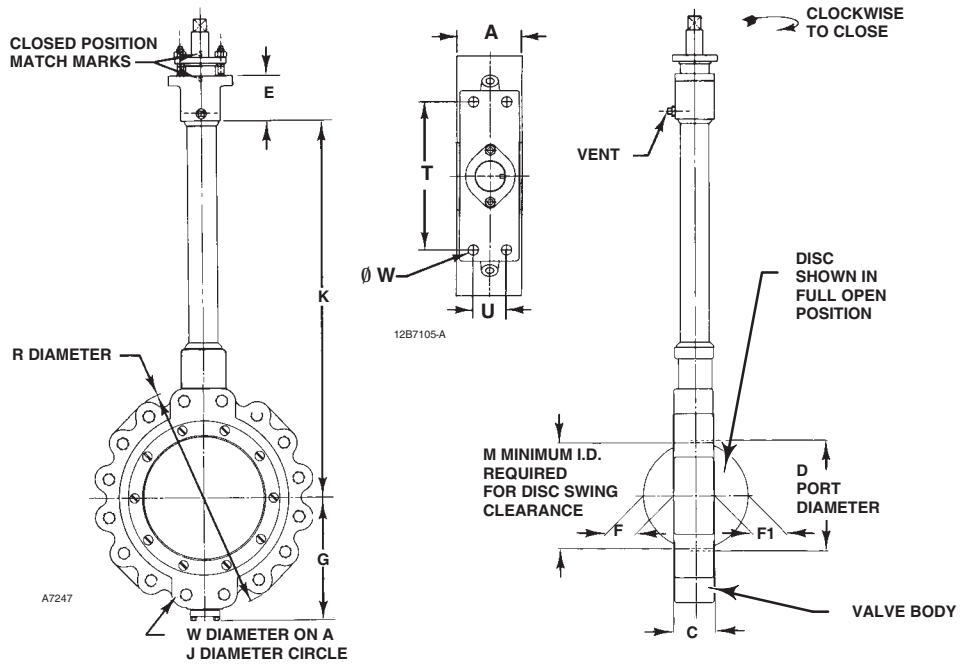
Dimensions, Single Flange Style Valve, CL300, NPS 8 through 24 (also see table 10)
